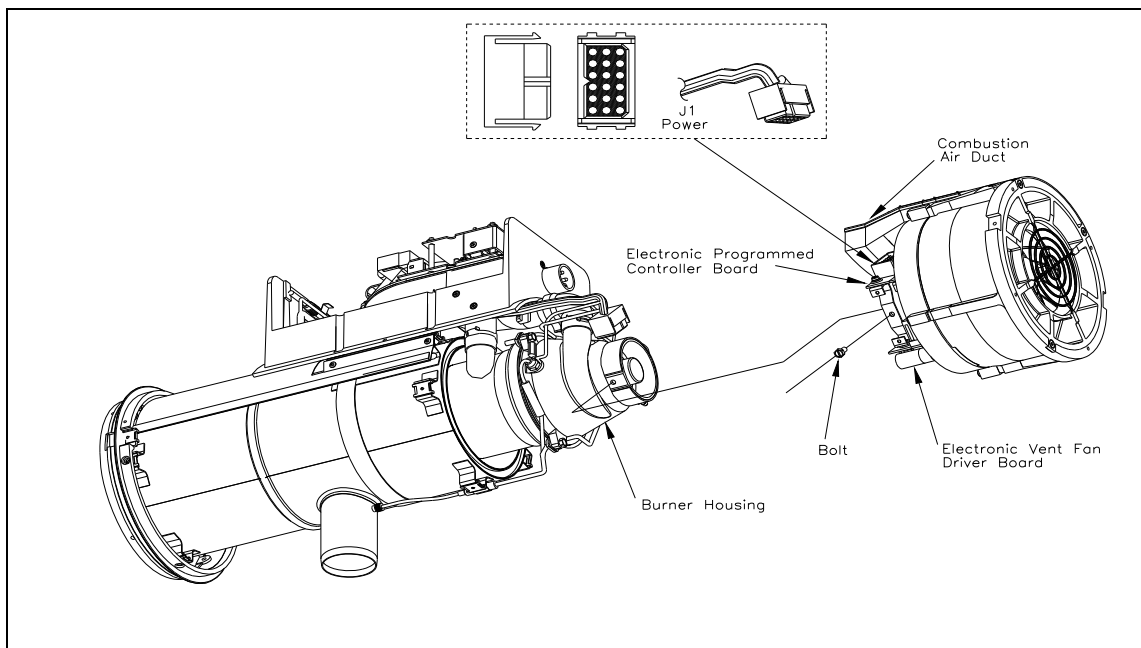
Bolt Removal Detail, Vent Fan Assembly
